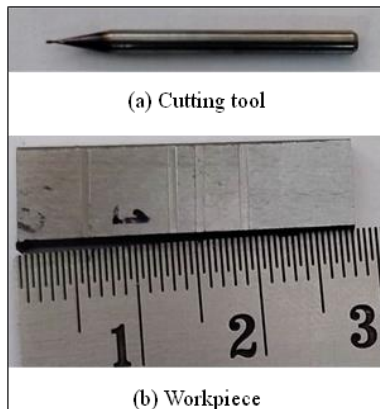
(a) The 2-flute end mill of shank diameter 3 mm and cutting tool of 1mm diameter. Fig. 1 (b), (c) The workpiece of width 8 mm and length 28 mm respectively
